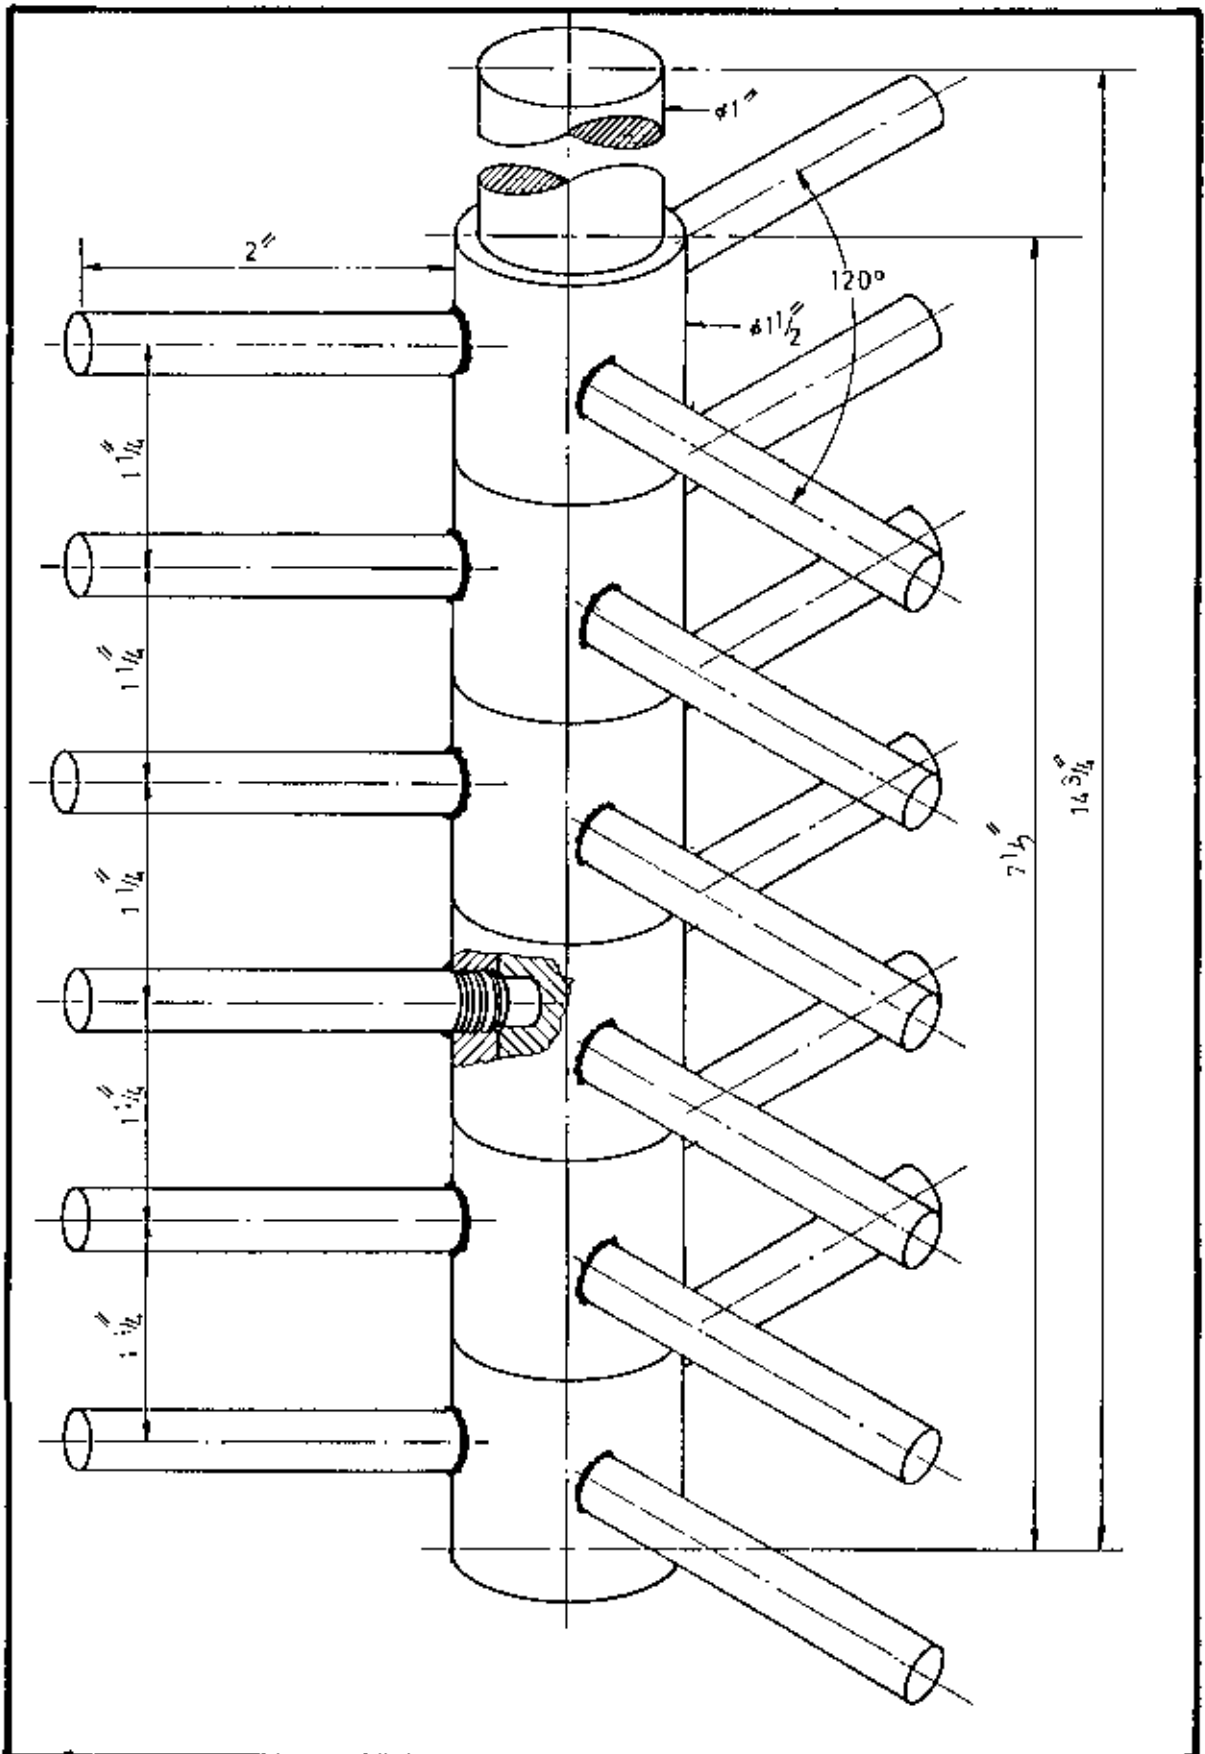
ISSOMETRIC DRAWING OF IMPELLER, SPACER & SHAFT COMBINATION
